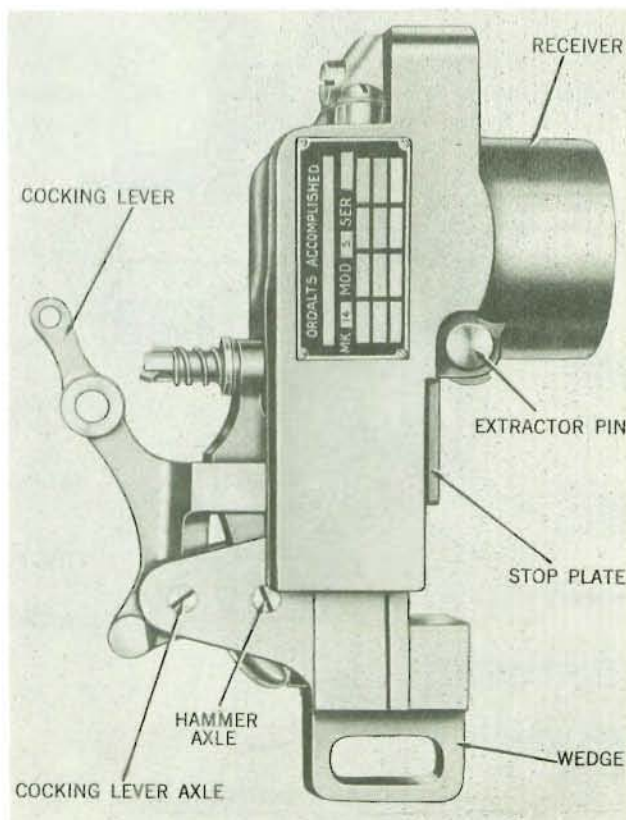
Firing Lock Mk 14 Mod 5 - Electrical Firing Position, Right Side
